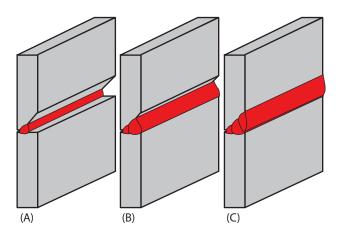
Practice 15-8 2G weld sequence.
